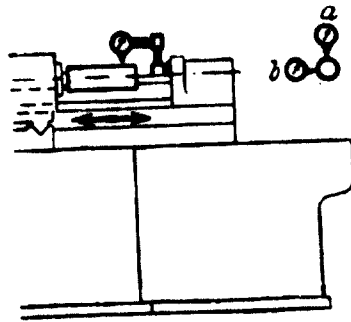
Testing Parallelism between Grinding-wheel Spindle and Table Movement
